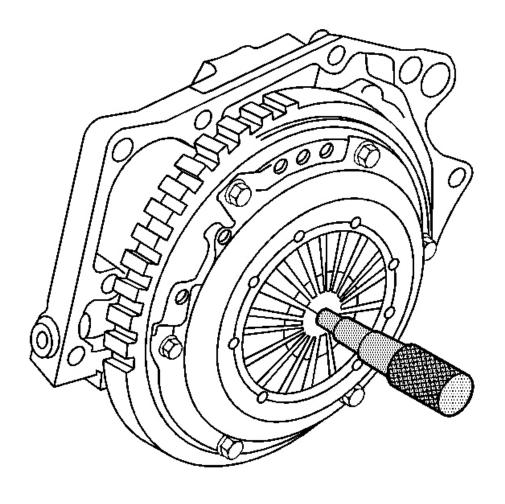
View Of Clutch Cover And Clutch Disc Courtesy of GENERAL MOTORS CORP.
